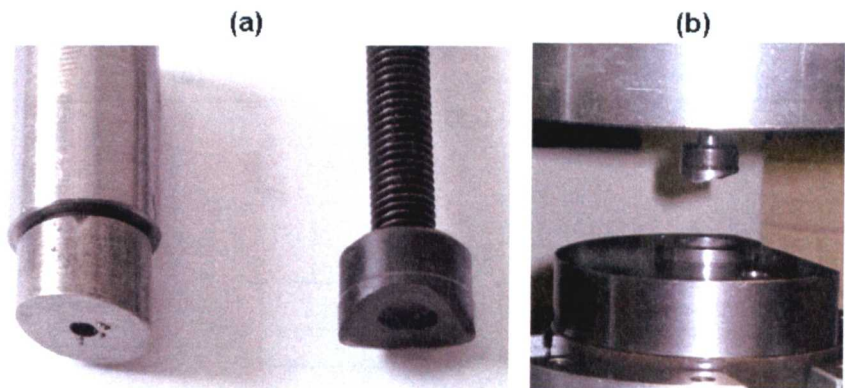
Photographs of (a) punches investigated and (b) punch and die.
